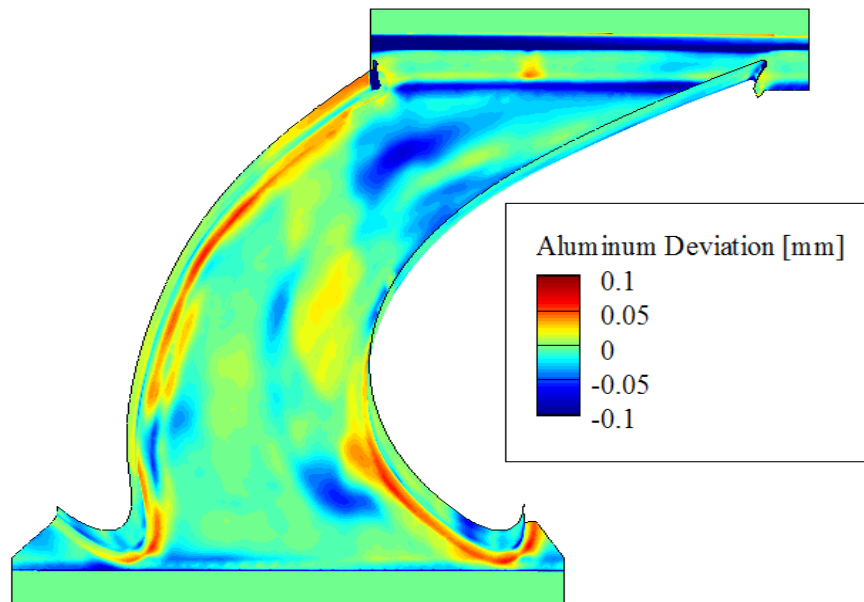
deviation of the actual, CNC machined part with reference to the nominal CAD geometry.
